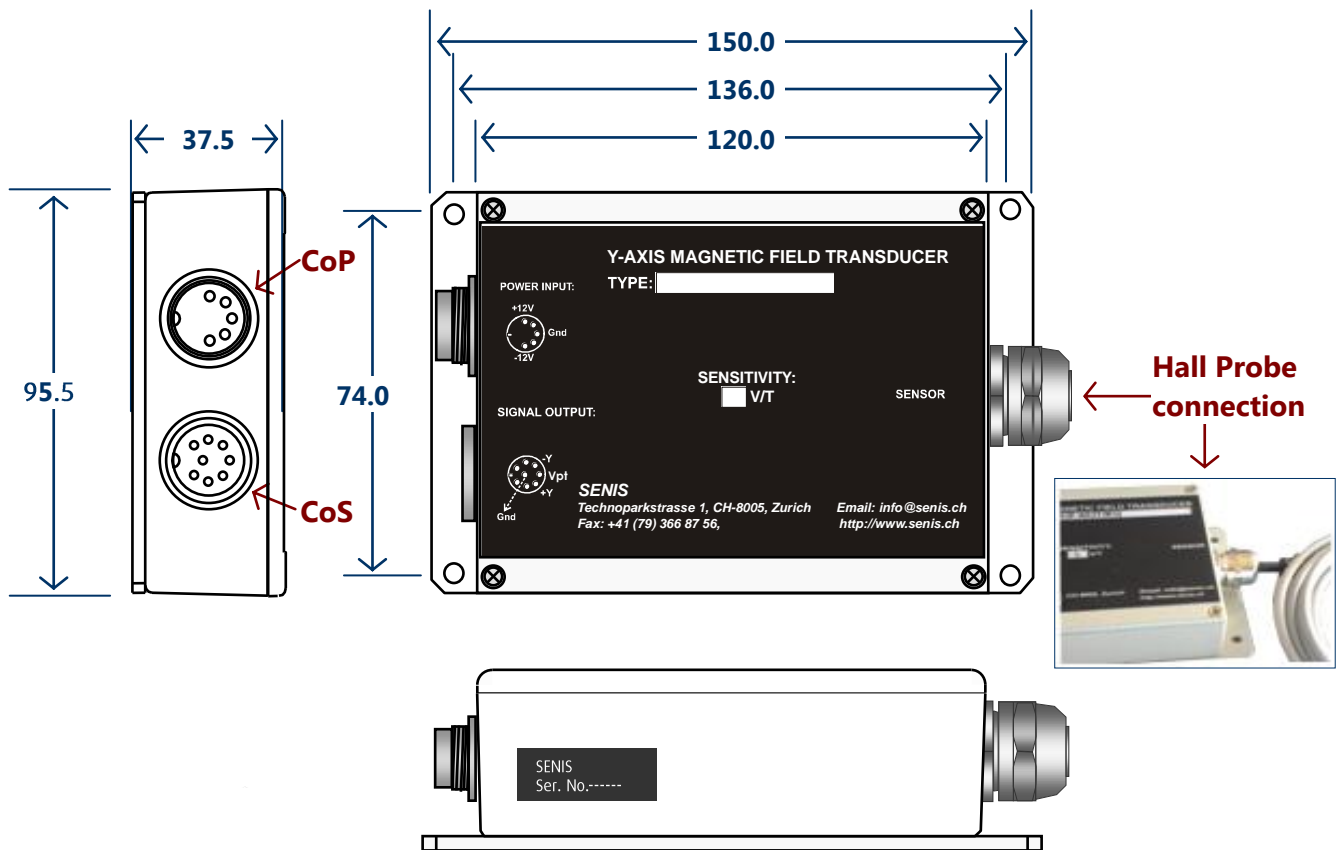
Structure, dimensions and tolerances of the single-channel analogue electronic module
